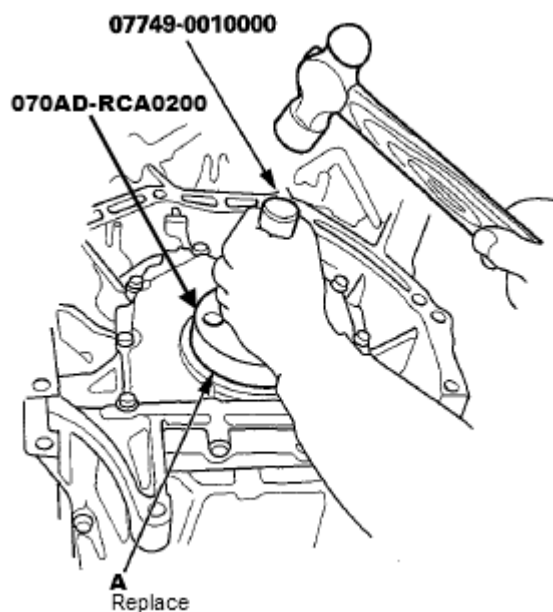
Tapping Transmission Crankshaft Oil Seal Using Hammer
